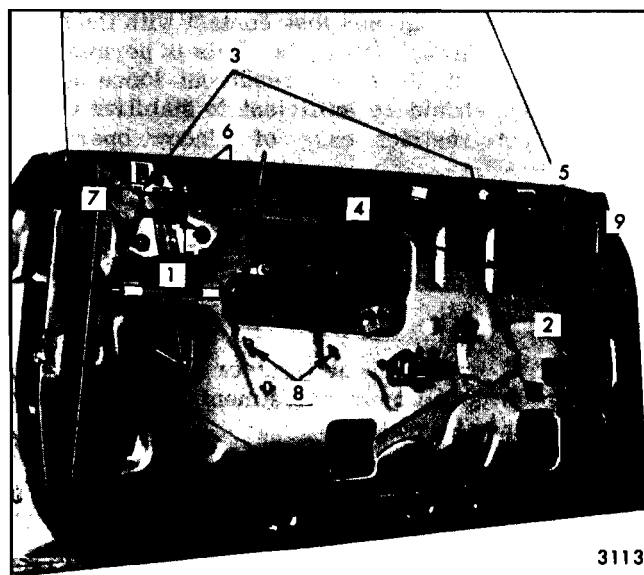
Front Door Window Removal and Adjustment - "A-37, 67 and 87" Styles and "G-57" Styles
